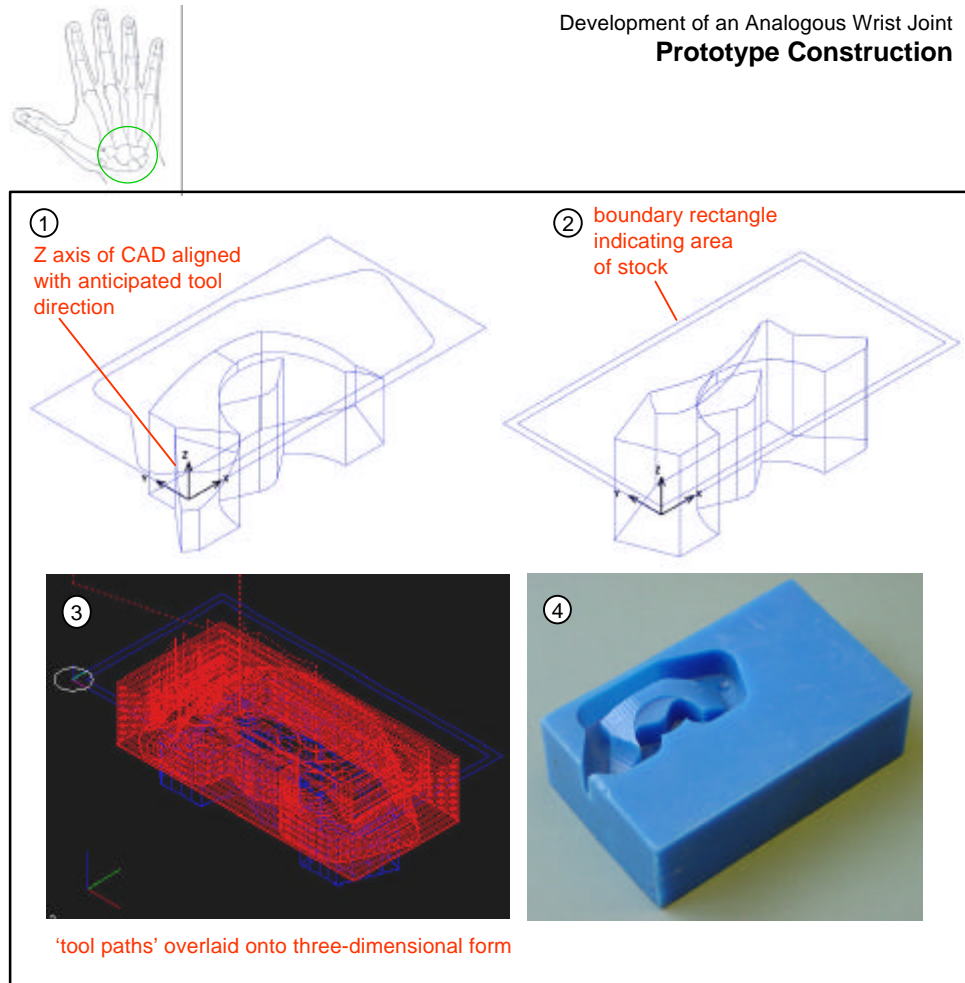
Three Dimension Machining of Distal Carpal Form
